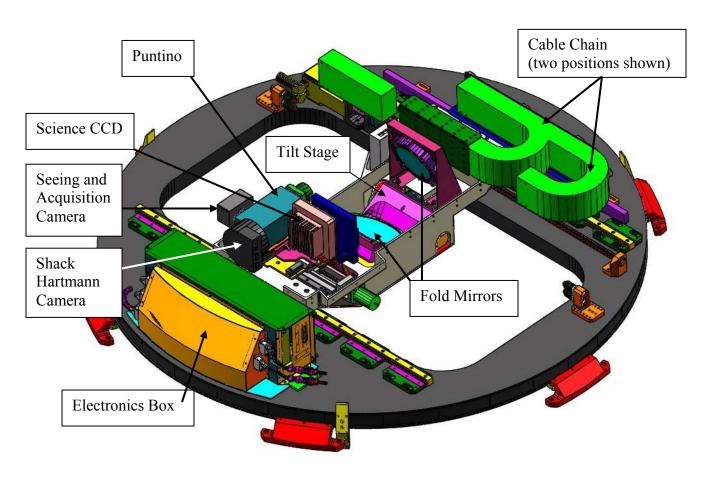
f/5 wavefront sensor with the cover removed. The stage assembly carrying the pickoff mirrors, Puntino and Apogee science camera is deployed to the on-axis position.
